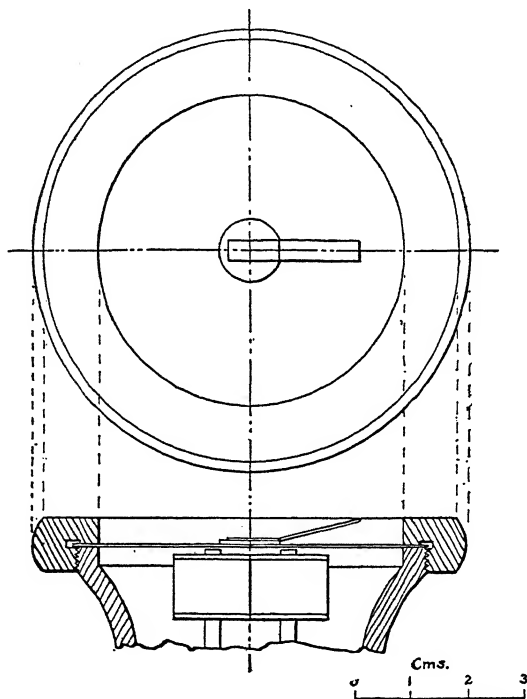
Plan and longitudinal section of the test receiver with secondary vibrational system attached to center of diaphragm.
